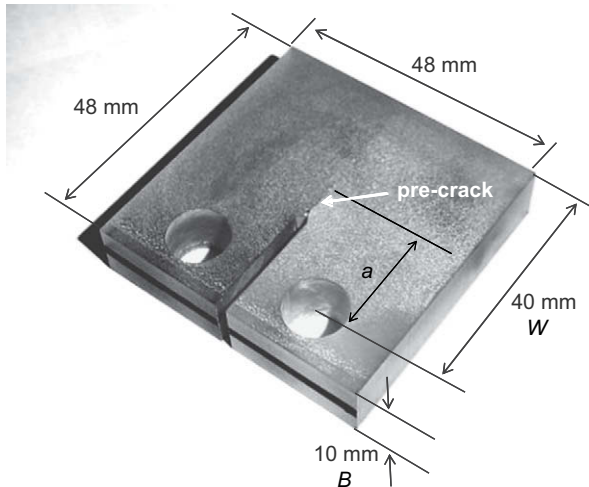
Compact tension (CT) specimen for fracture toughness measurement.
